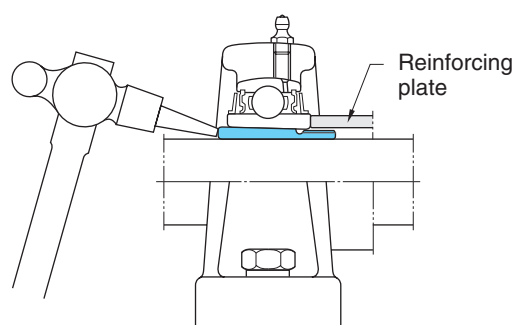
Fitting adapter sleeve to bearing with tapered bore
